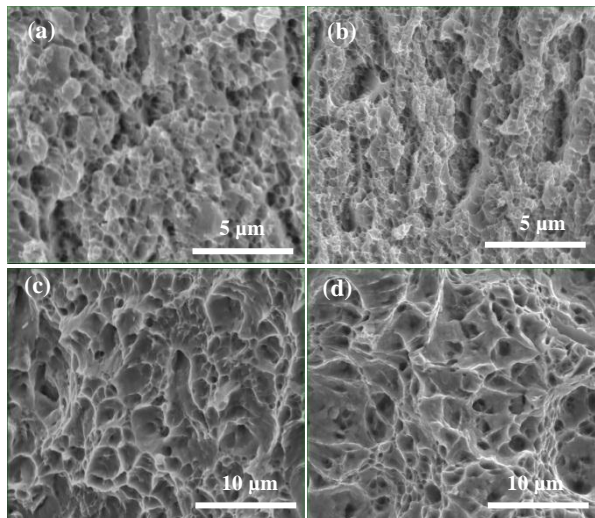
Fracture surface of (a) conventional Q&P after heating at 10°C/s and soaking, after flash heating at (b) 10°C/s, (c) 500°C/s, and (d) 1000°C/s
